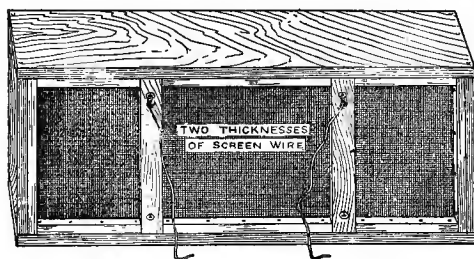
Detail of Bottom of the Plate-Warmer Shown in Fig. 161.
